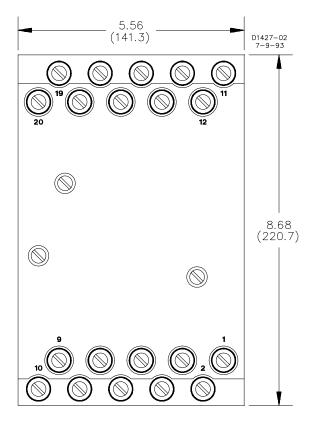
S1 Case, Projection Mounting, Outline Dimensions, Rear View
